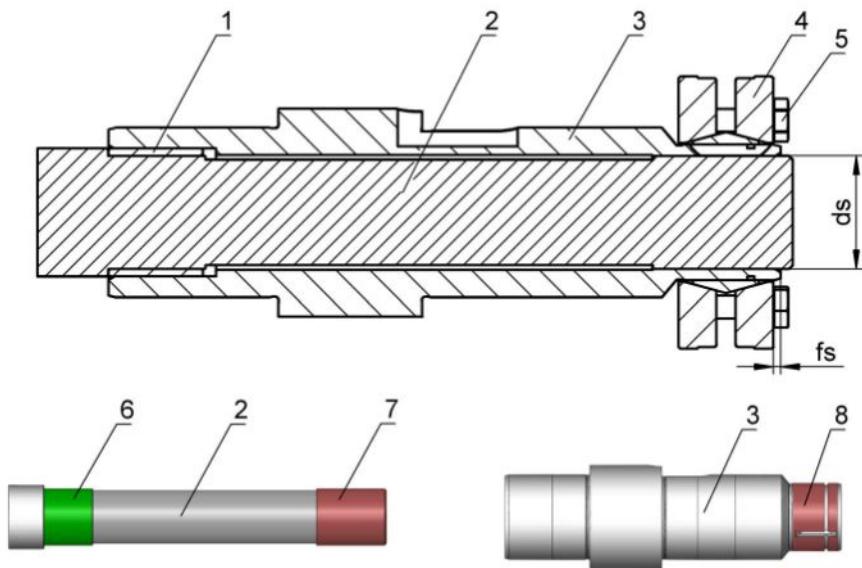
Assembly – Machine shaft on hollow shaft with shrink ring
